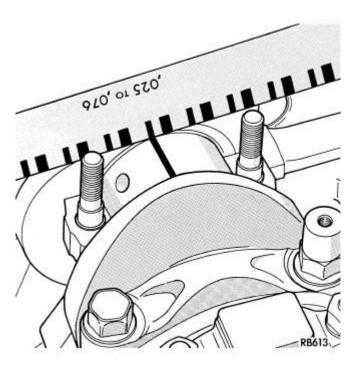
Checking Connecting Rod Bearing Clearance With Plastigage Courtesy of CHRYSLER GROUP, LLC
